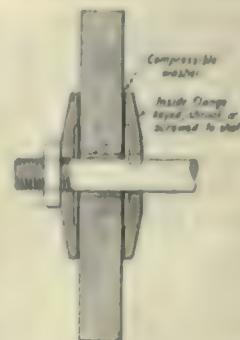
CORRECT MOUNTING FOR GRINDING WHEEL
